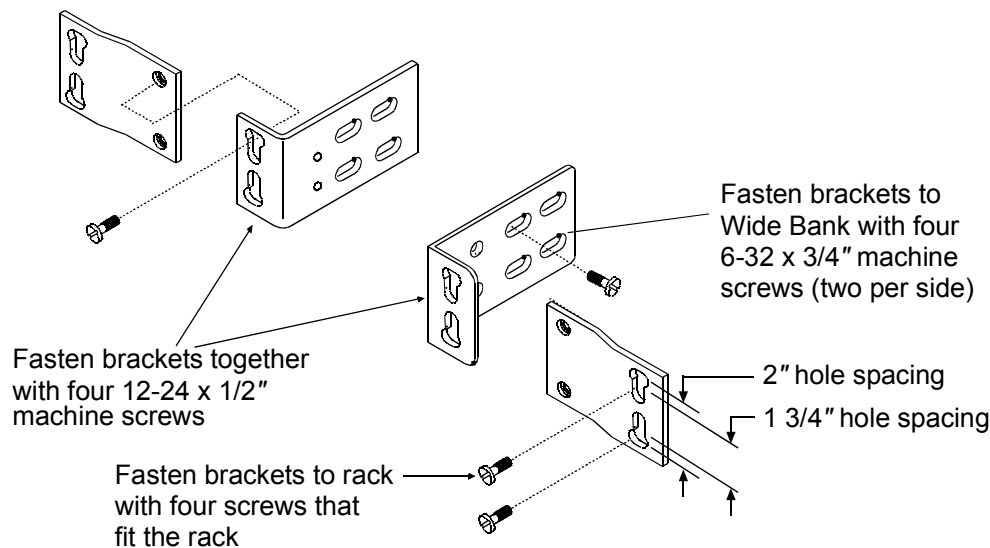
Universal Rack-Mounting (19-inch or 23-inch) Brackets (PN 710-0153)
